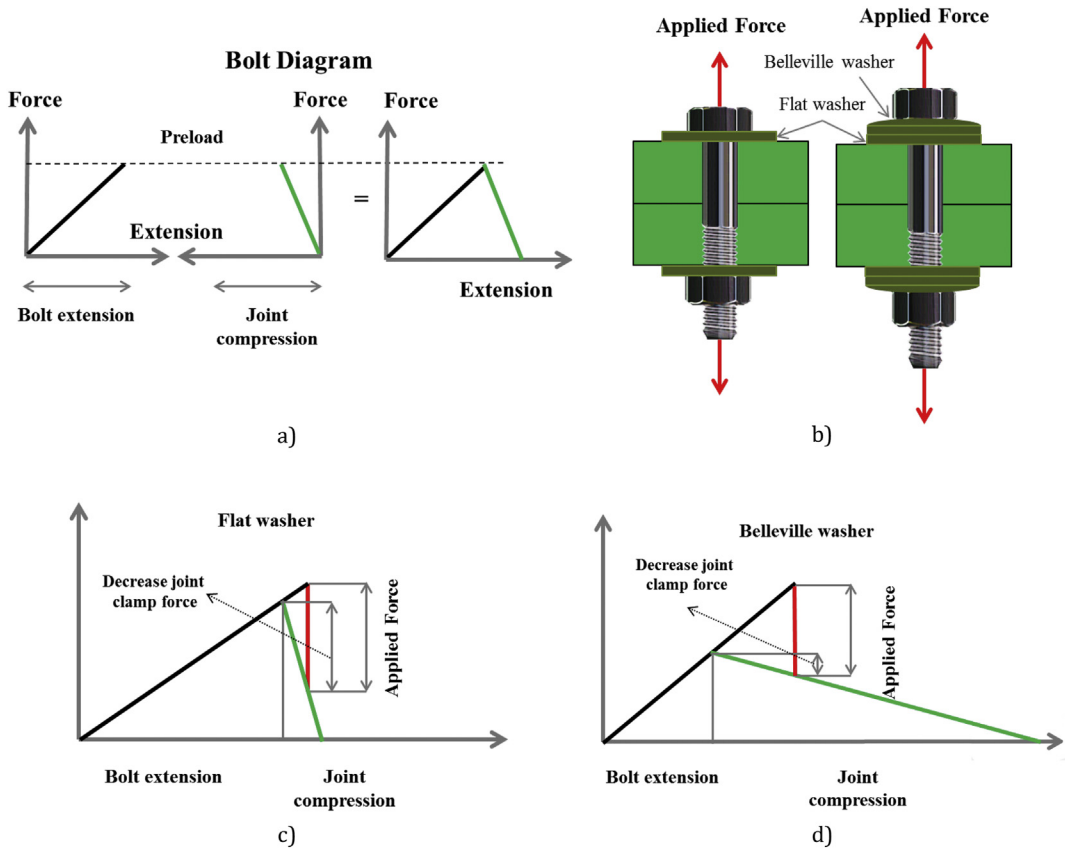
Bolt diagram: a) Joint stiffer than the bolt (without Belleville spring); b) Deformable assembly (with Belleville spring).
